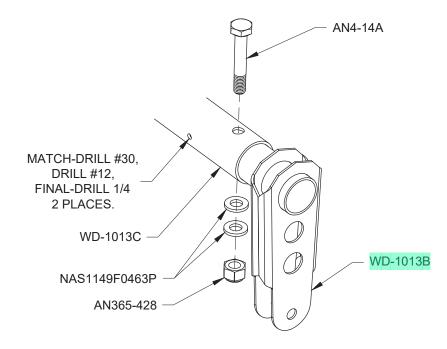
BOLT AND DRILL FLAP TORQUE TUBE AND FLAP HORN
